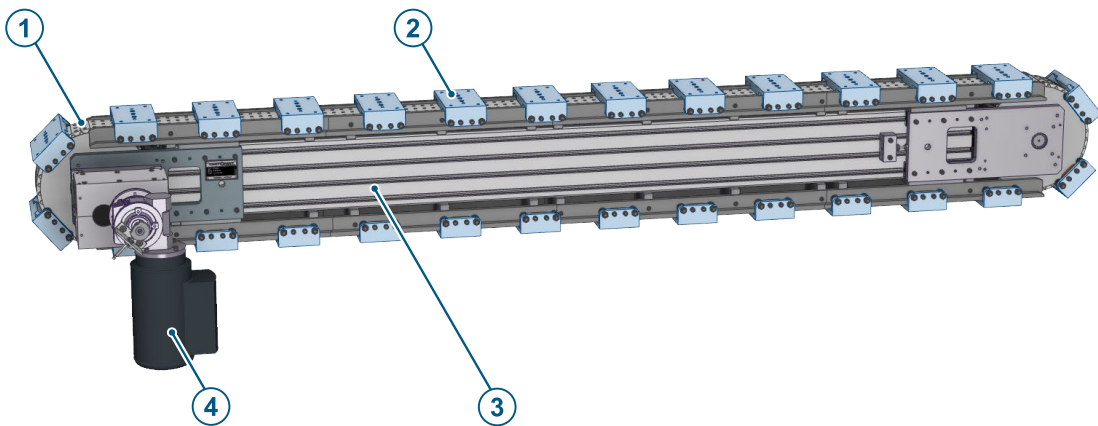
RFA linear transfer system with XP flat cam gear, worm gear and servo motor
